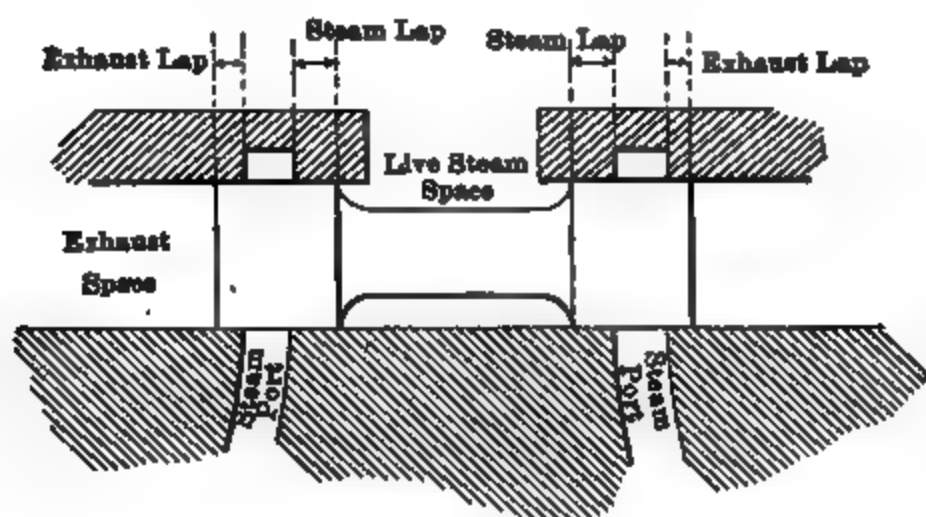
Piston Type of Slide Valve in Mid-position.
